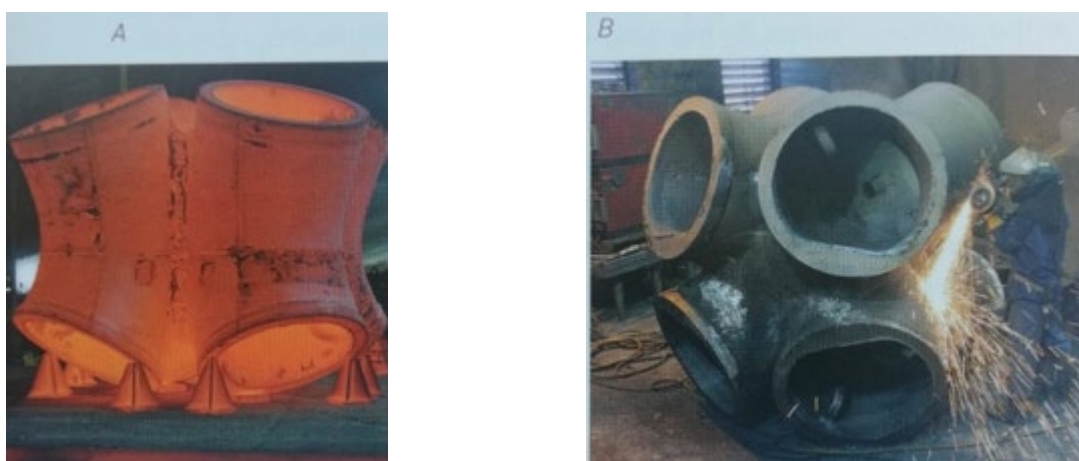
Manufacture of a cast steel node: A - cooling of the cast, B - mechanical finishing work on the component
